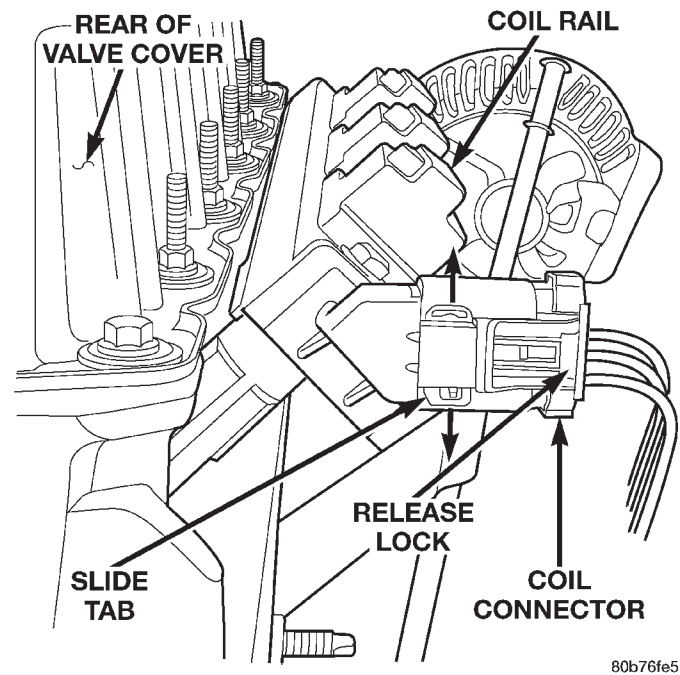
Ignition Coil Connector Removal—4.0L 6-Cylinder Engine
